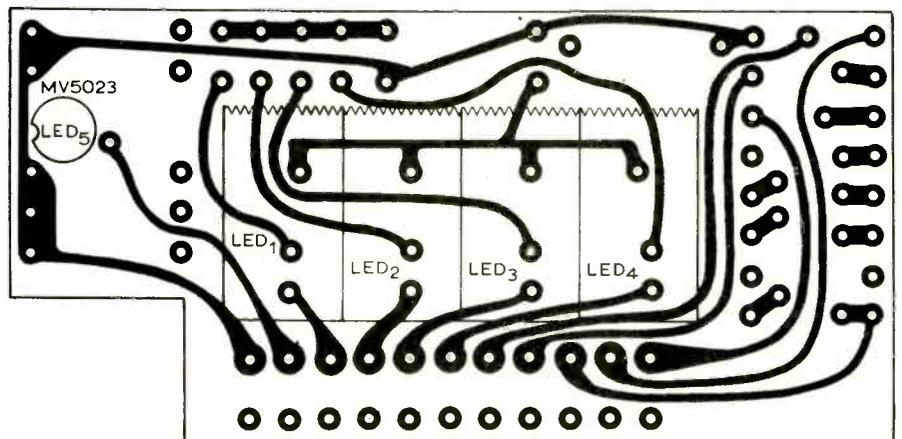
Component layout and connecting tracks on the front of the display p.c. board.
